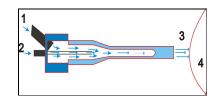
Cold Spray Gun: 1 - gas supply; 2 powder supply; 3 - supersonic gas and powder flow; 4 - piece to be sprayed
